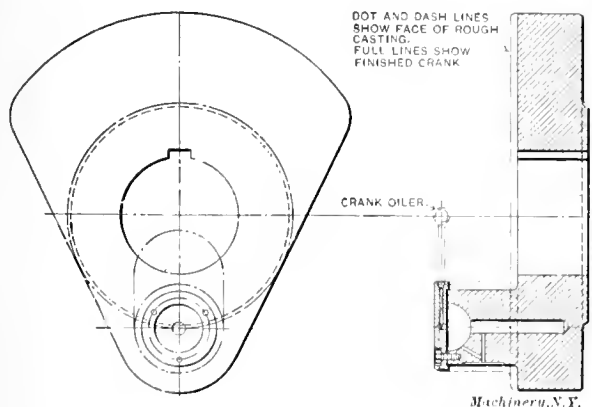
Detail of Crank and Crank-pin, which form one Solid Piece made from the same Steel Casting
